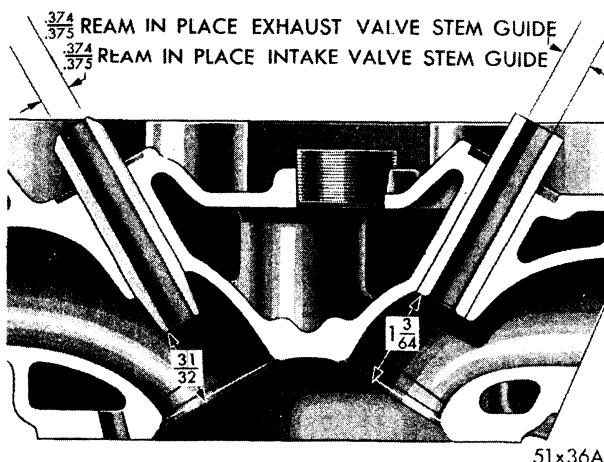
Exhaust and Intake Valve Guide Installed in Head (FirePower)
